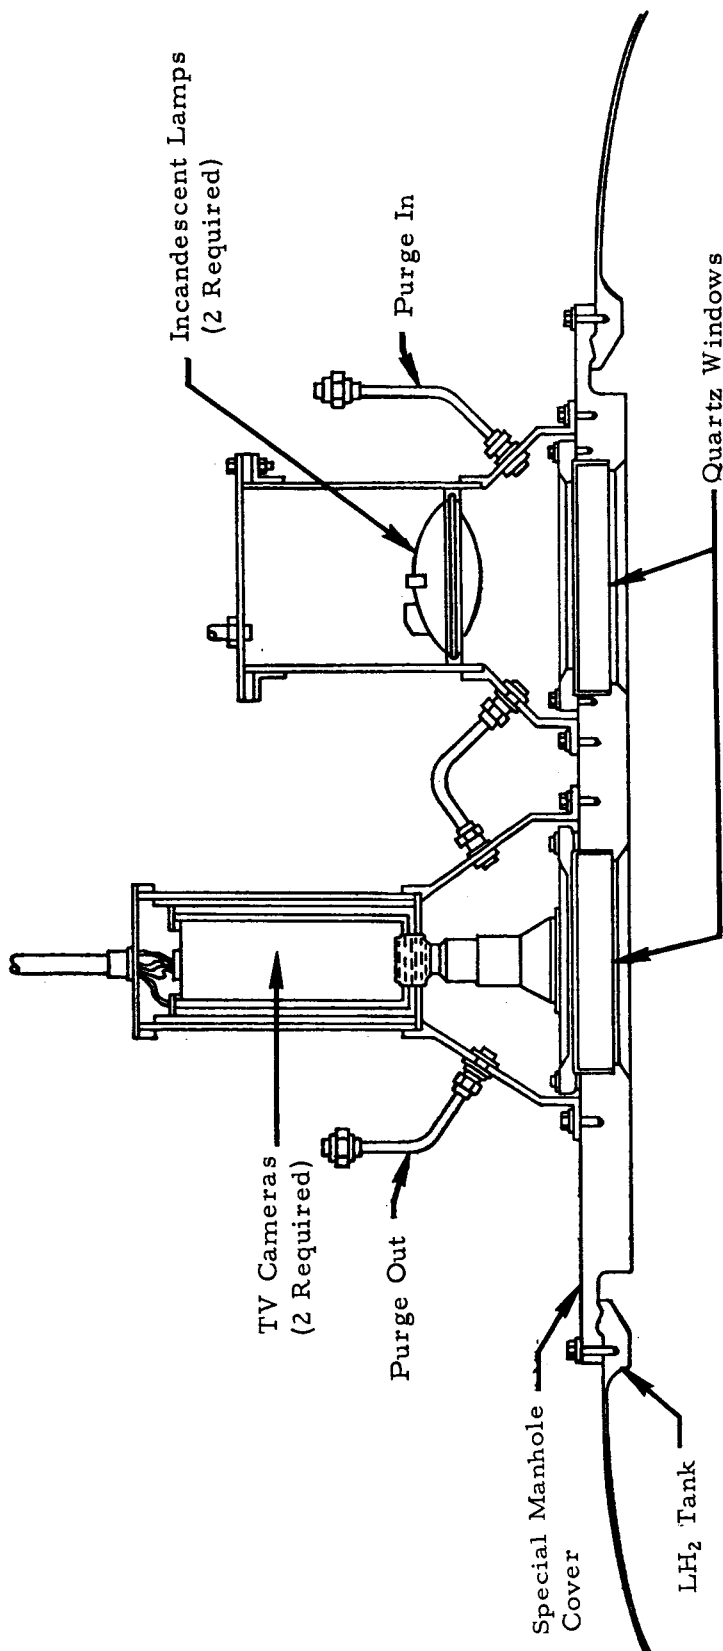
LIQUID HYDROGEN TANK TV CAMERA MANHOLE INSTALLATION
